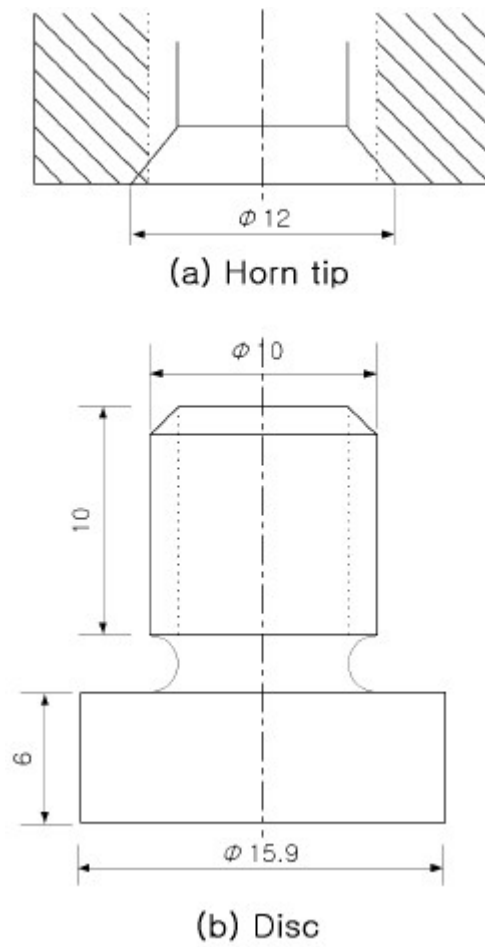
1. Schematic dimension of test specimen(unit : mm).
